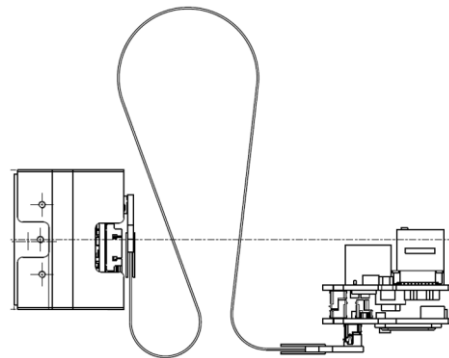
Drawing of the CamSight HD core with GigE Vision interface board
